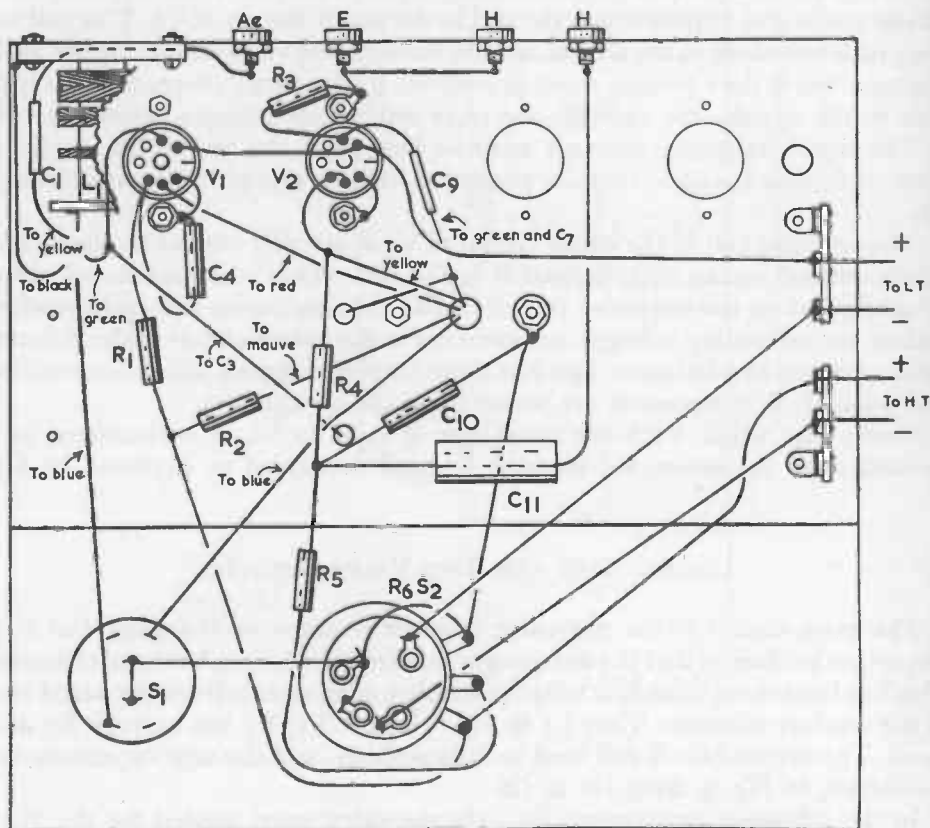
UNDER-CHASSIS VIEW OF THE TWO-VALVE RECEIVER.
